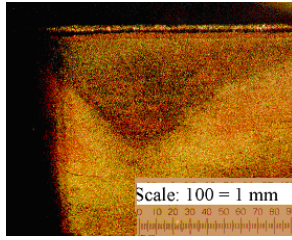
Picture showing flank wear for a dry cut after 7 minute of machining at a cutting speed of 190 m min⁻¹ and feed rate of 0.23 mm/rev with a 2 mm depth of cut
